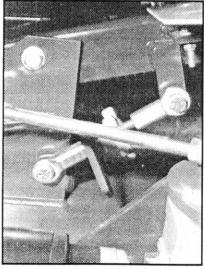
B. Elevation adjustment on Skeet, ATA machines.
